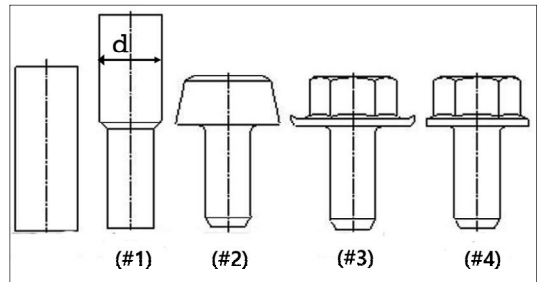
The procedural steps for cold forging a large flange bolt with a trimming process
